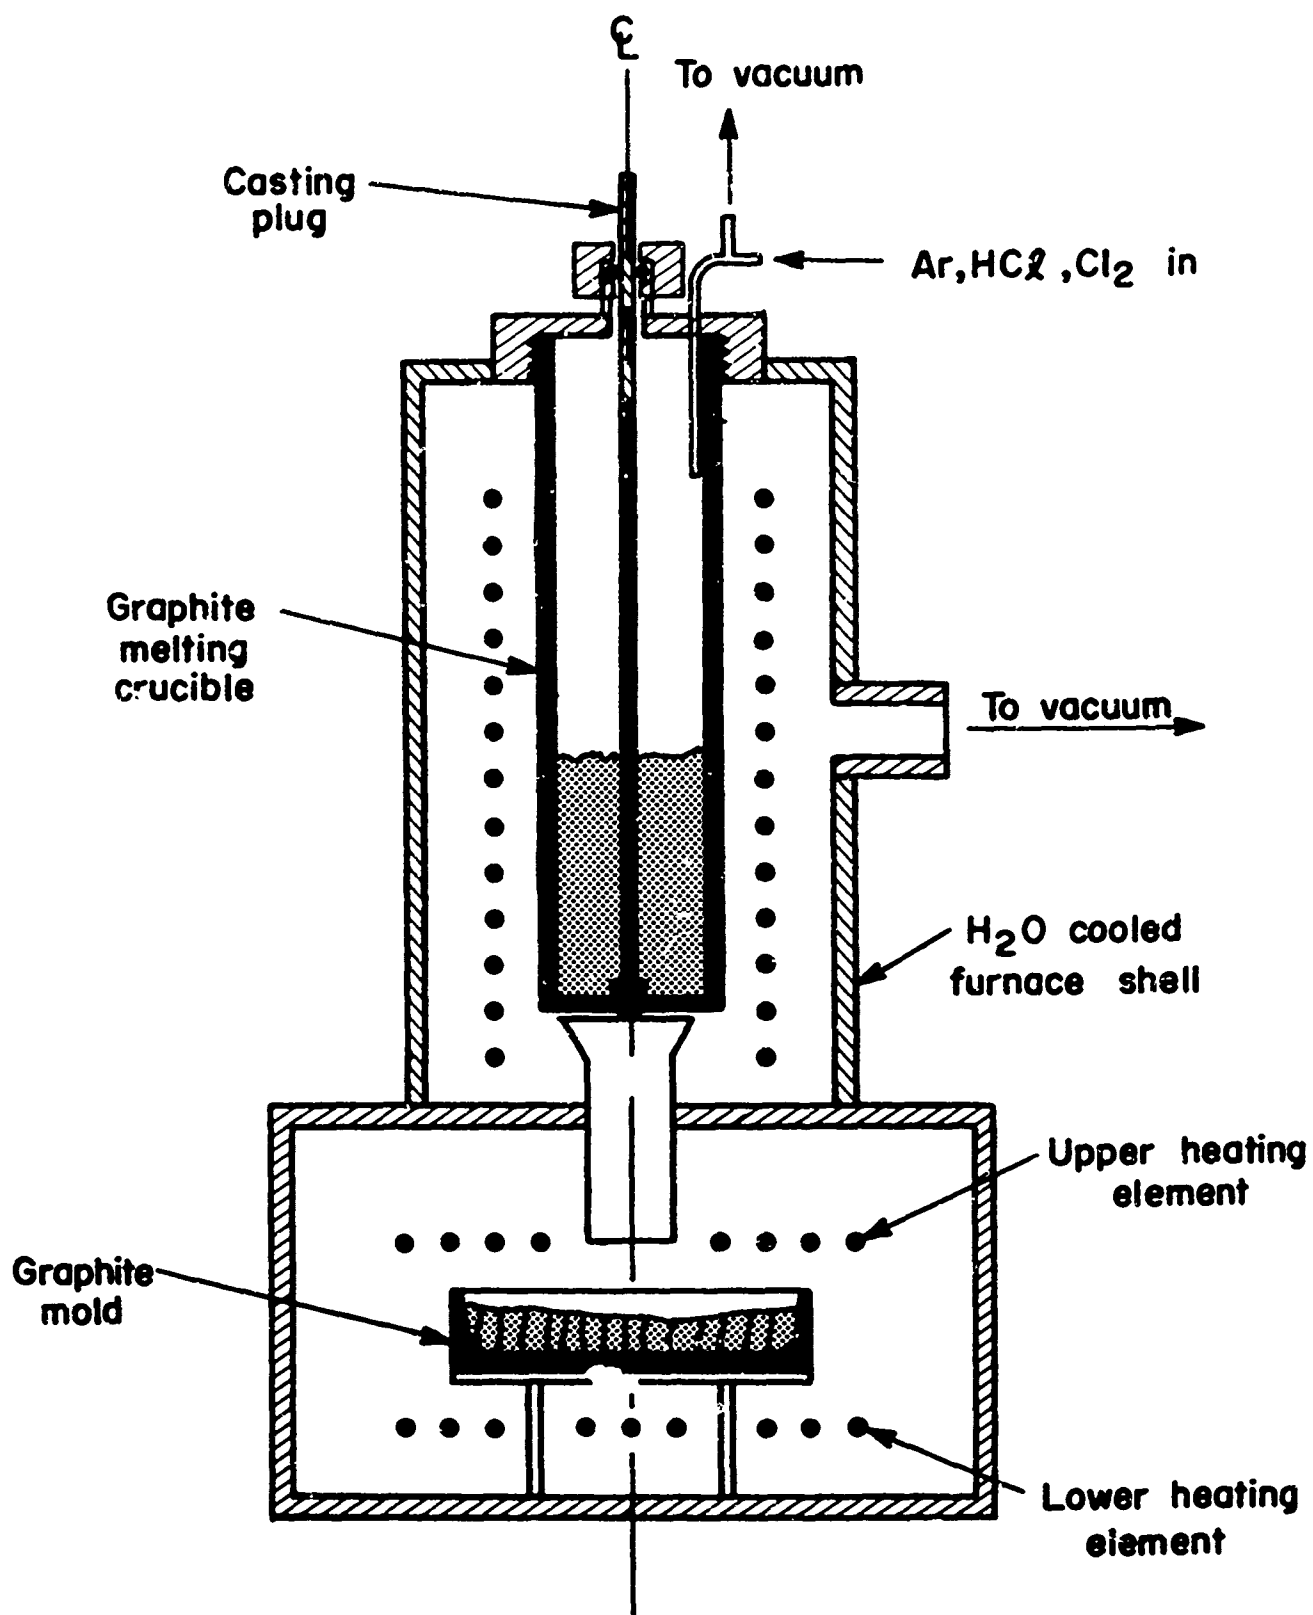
Schematic Diagram of Eight Inch Diameter Vacuum Halide Casting Furnace.
